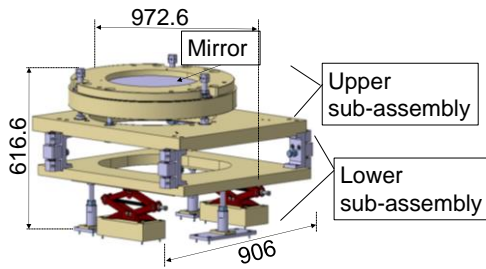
M2 mirror assembly showing overall dimensions in millimetres and the main sub-assemblies.
